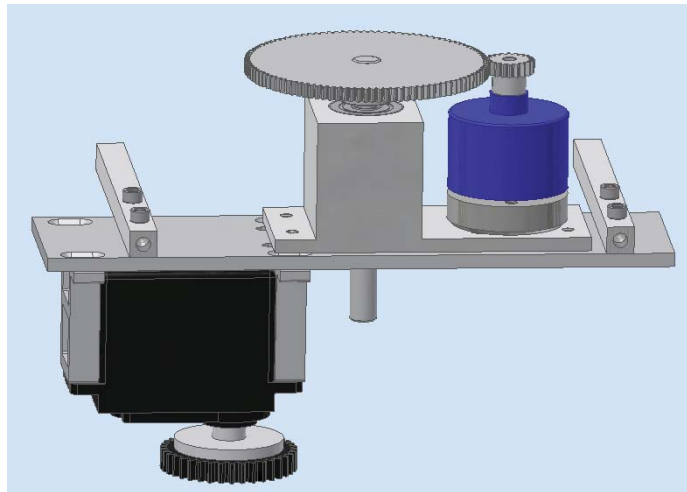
Final SPU Upper Plate Design. The upper plate of the SPU served as a mounting location for all actuators associated with the thruster. A gearbox and motor combination mounted on top of the plate powered the propeller. A servo mounted under the plate was used to turn the shaft and gear housing.
